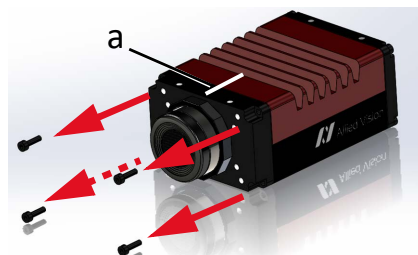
Removing the four M2 x 8 socket head cap screws of the front assembly
